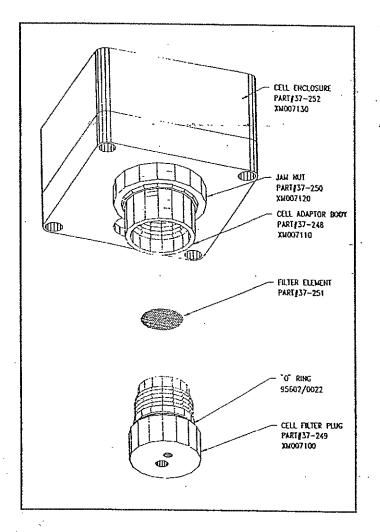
CO MONITOR FILTER HOUSING PARTS
